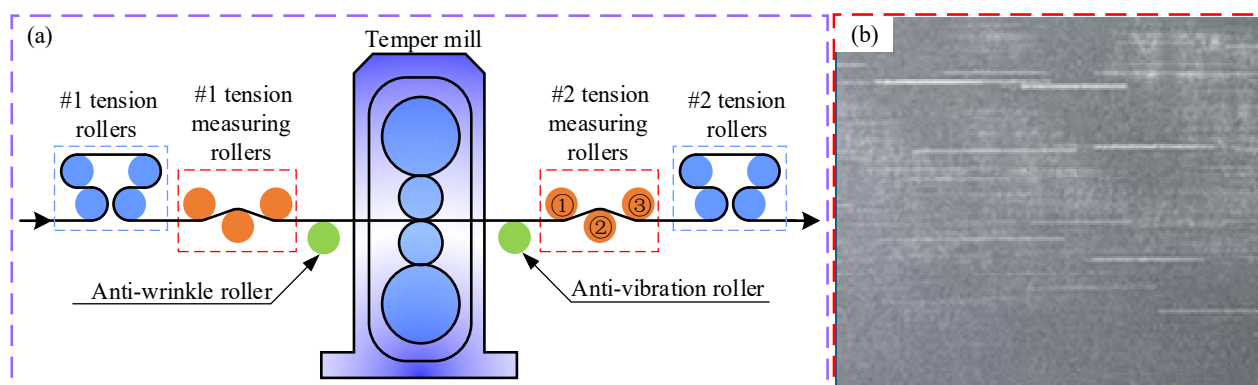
Temper mill unit layout and steel strip scratch defects: (a) temper mill unit layout; (b) steel strip scratch defects.
